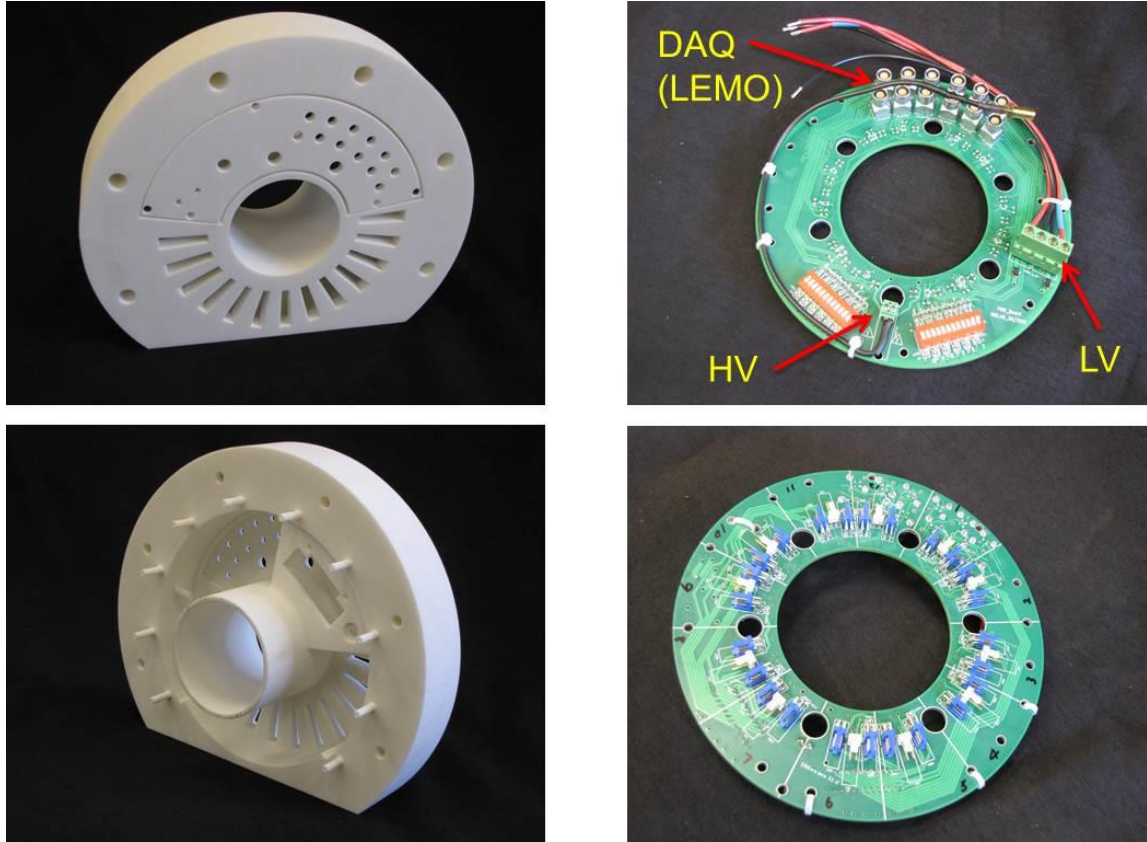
System rear cover and 12 channel electronics PCB board
